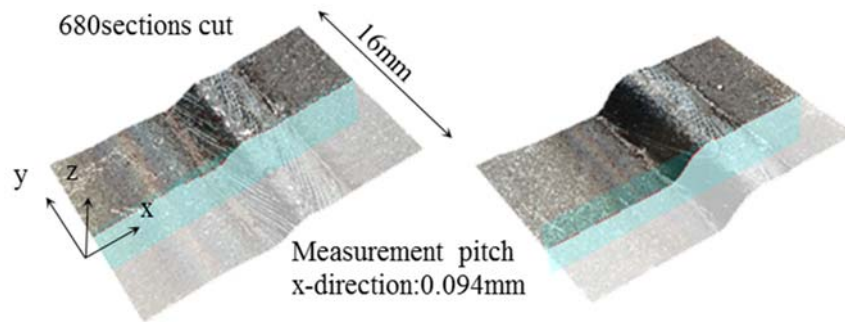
Measurement condition of weld toe curvature and flank angle.
